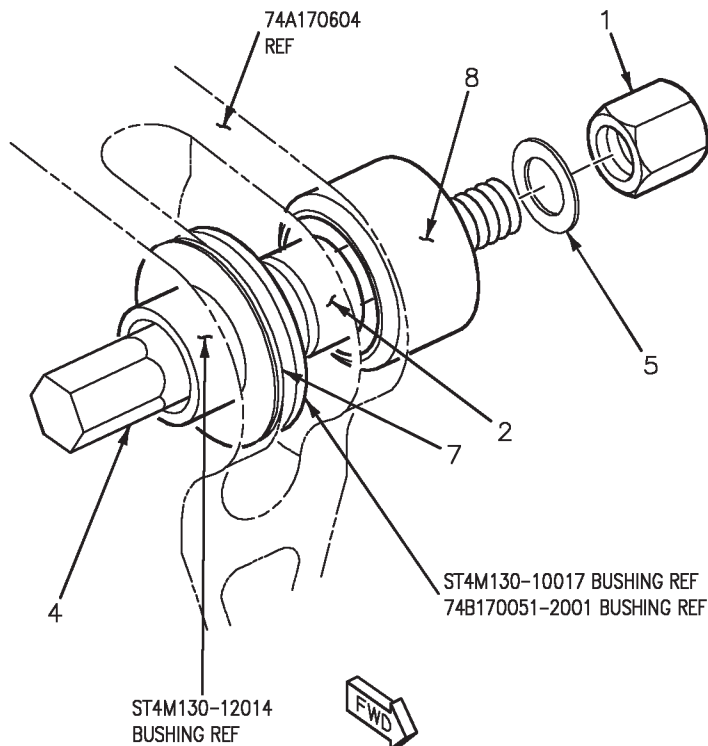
Bushing Removal, Installation, and Reaming (Sheet 14)
